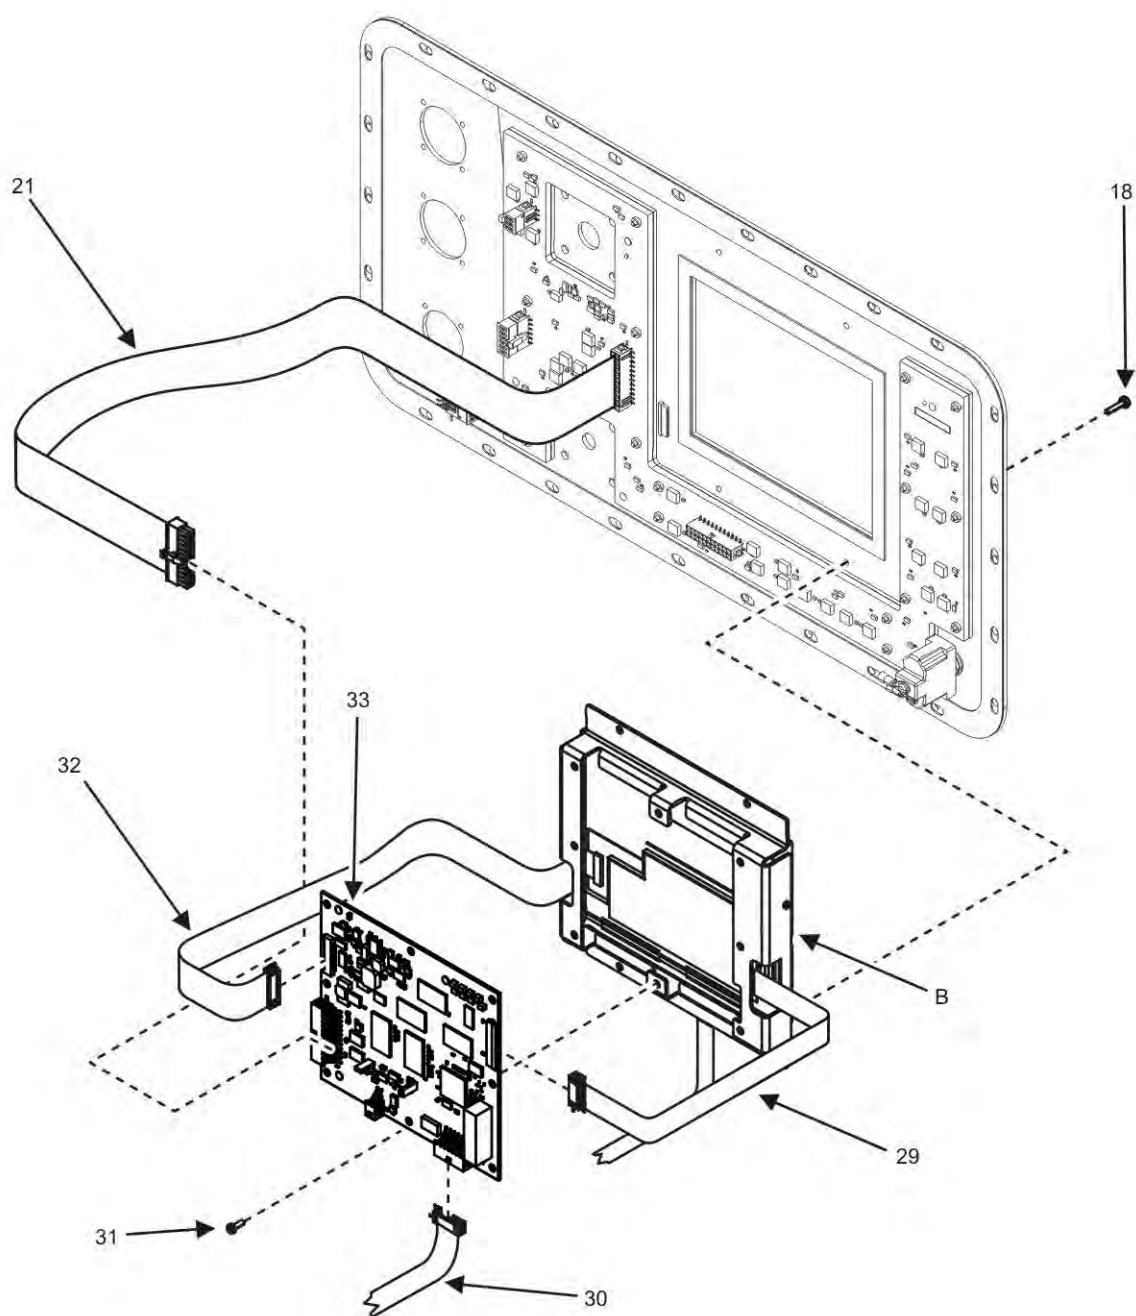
DCS Control Panel Assembly (Sheet 5 of 6).
